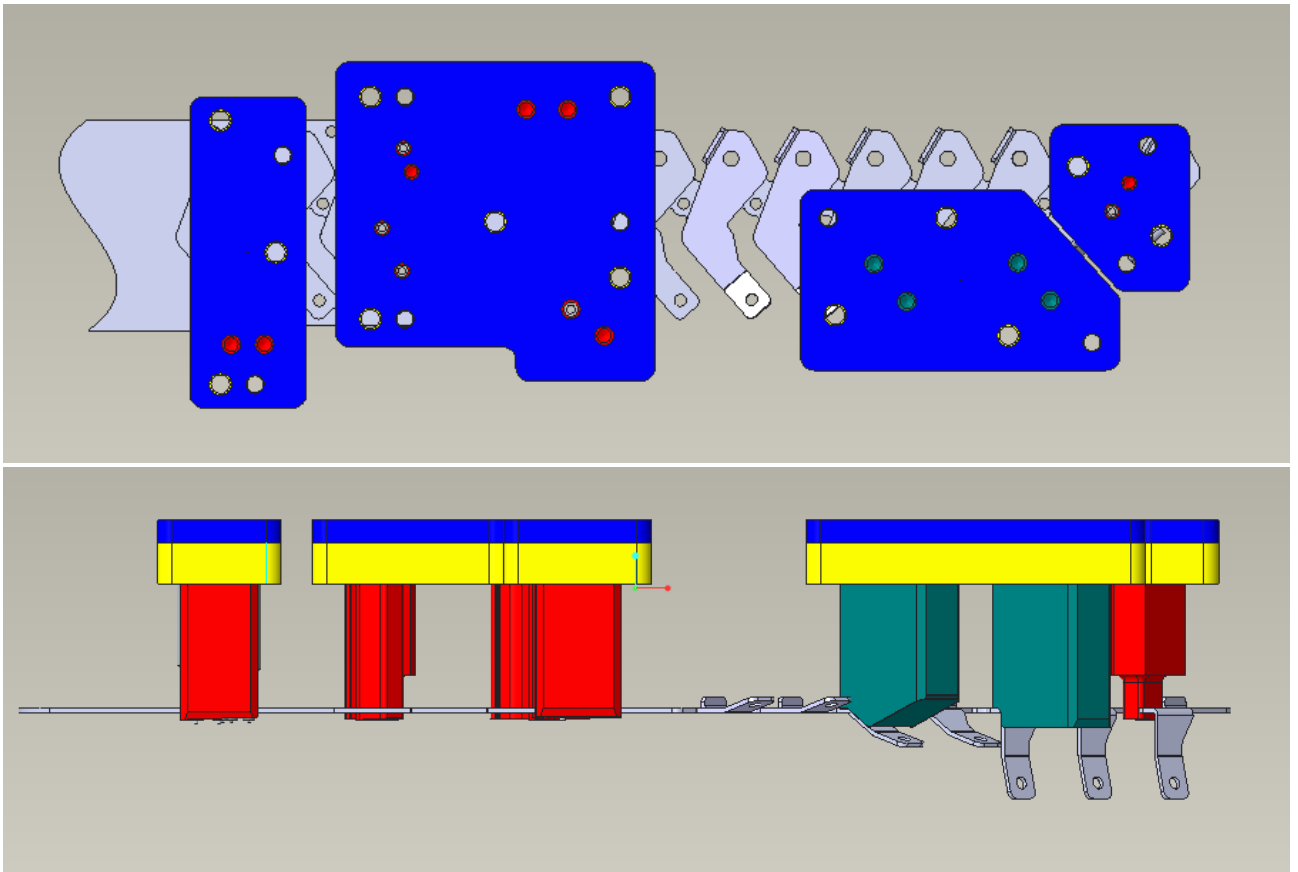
Cutting and forming punch holder plates, top and front view. Red – cutting punches; light blue – forming punches; yellow – punch holders
